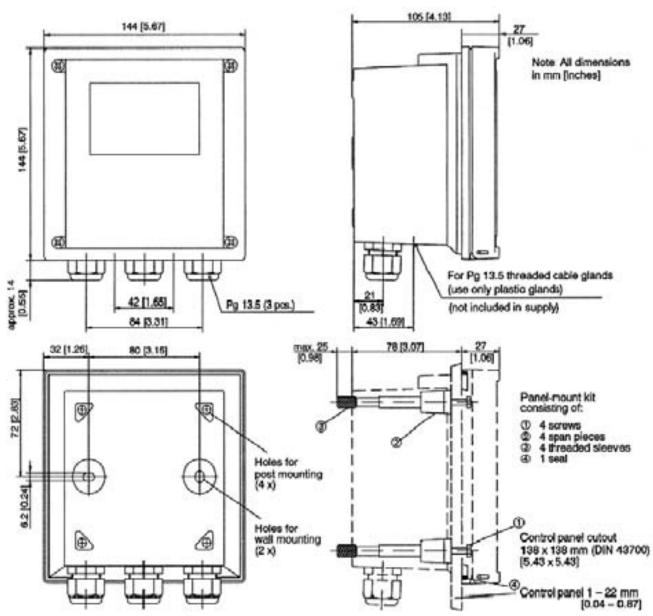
Dimension Drawing for APT4000 and P/N 51205990-001 panel mounting kit
